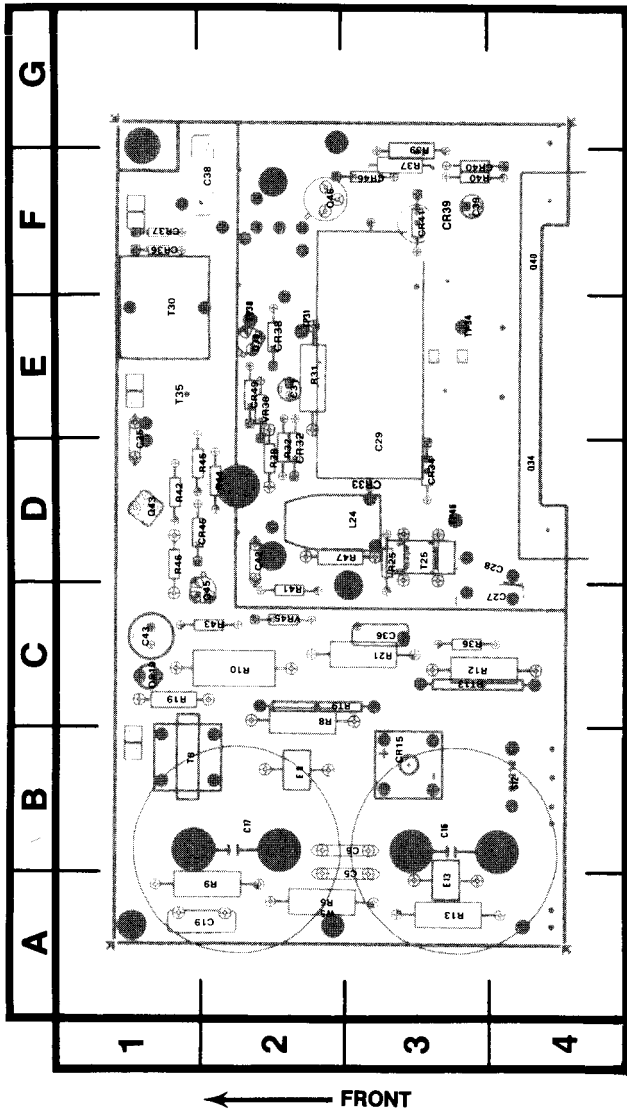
A14A3-Inverter Circuit Board Assembly.
